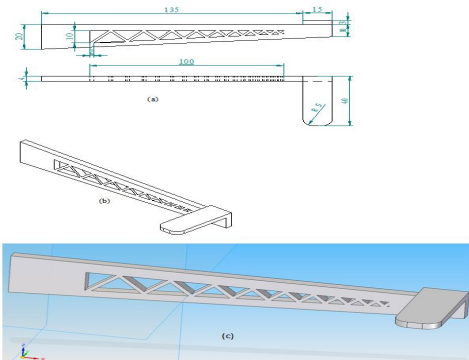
(a) Optimized 2D brake pedal with ribs, (b) and (c) Optimized 3D brake pedal with ribs CAD model
